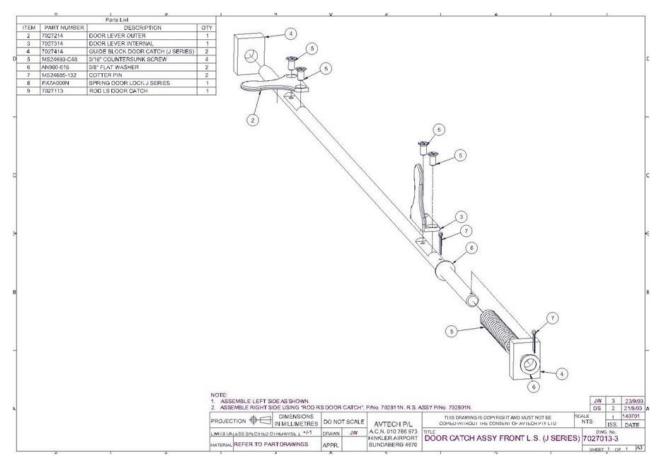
J200-Type Door Latch Mechanism Assembly (J200/J400)
